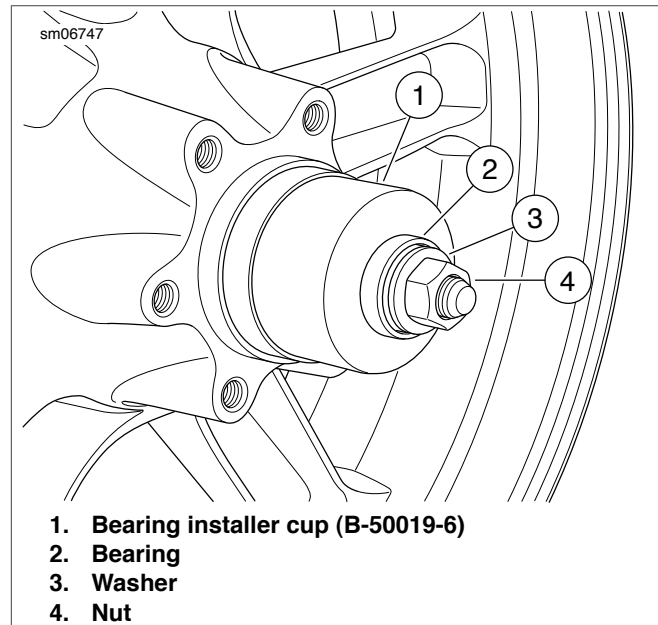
Pressing in the Sprocket Side Inner Wheel Bearing
